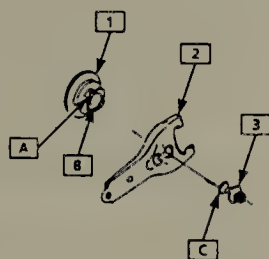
The clutch release bearing must be lubricated at the points shown before installation
